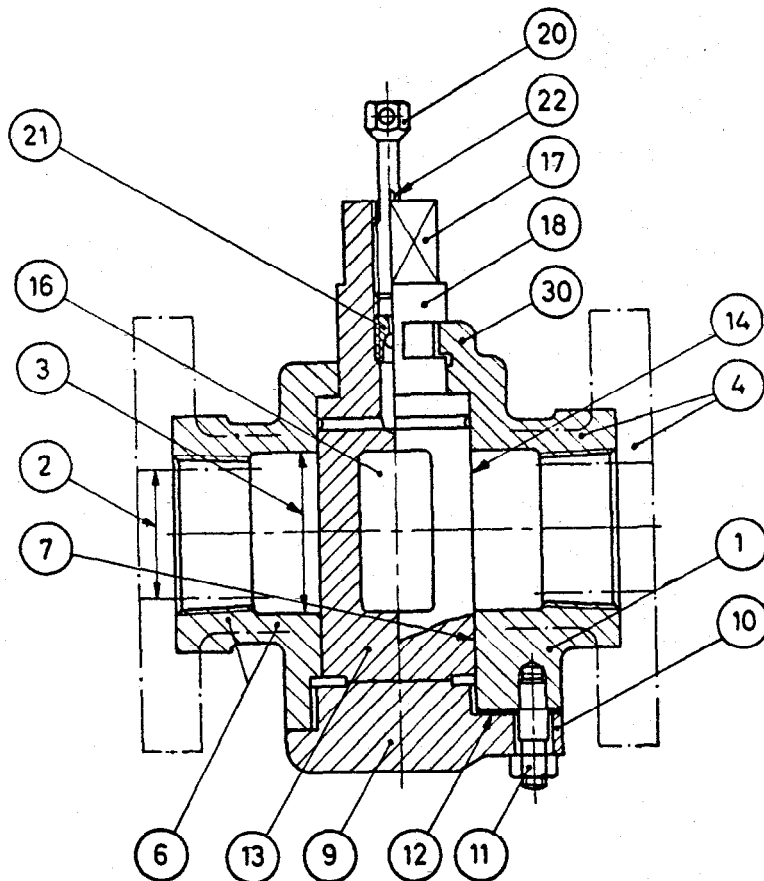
LUBRICATED PLUG VALVE, PARALLEL PLUG
